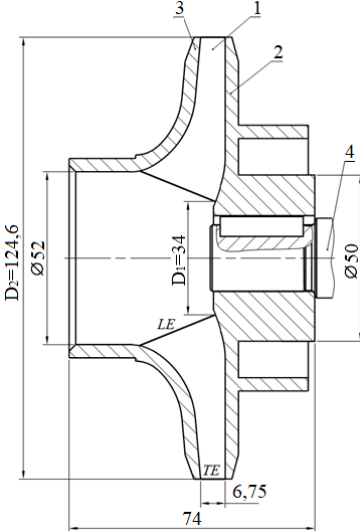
Diagram with gauge dimensions of centrifugal pump impeller model of pump impeller blades CH 6.3/20-1.1-2 in axial section
